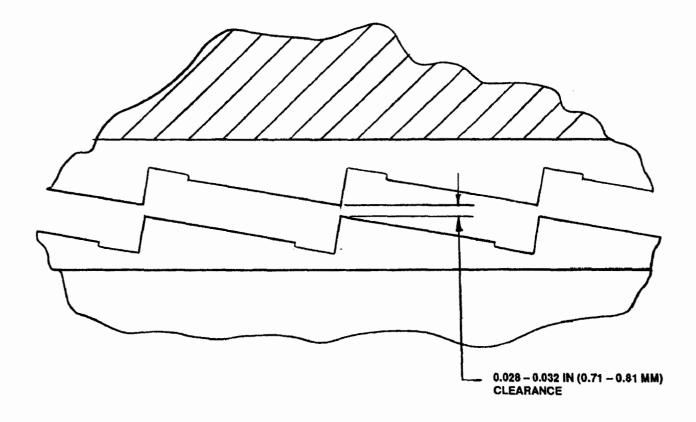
Output Shaft Jaw to Clutch Jaw Tooth Clearance
